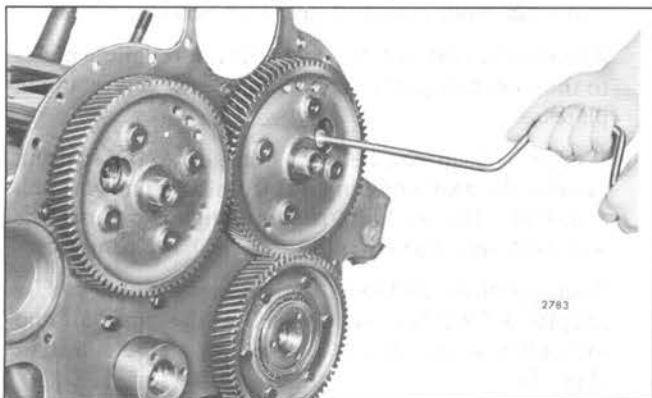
Removing or Installing Camshaft End Bearing Retaining Bolts
